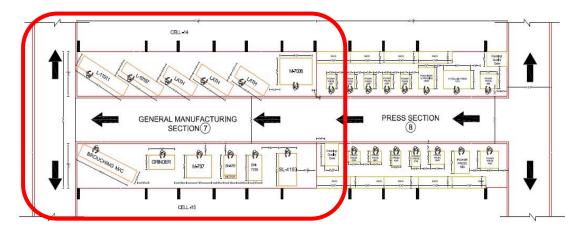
Layout of General Manufacturing section (Cell 12 & 13)
